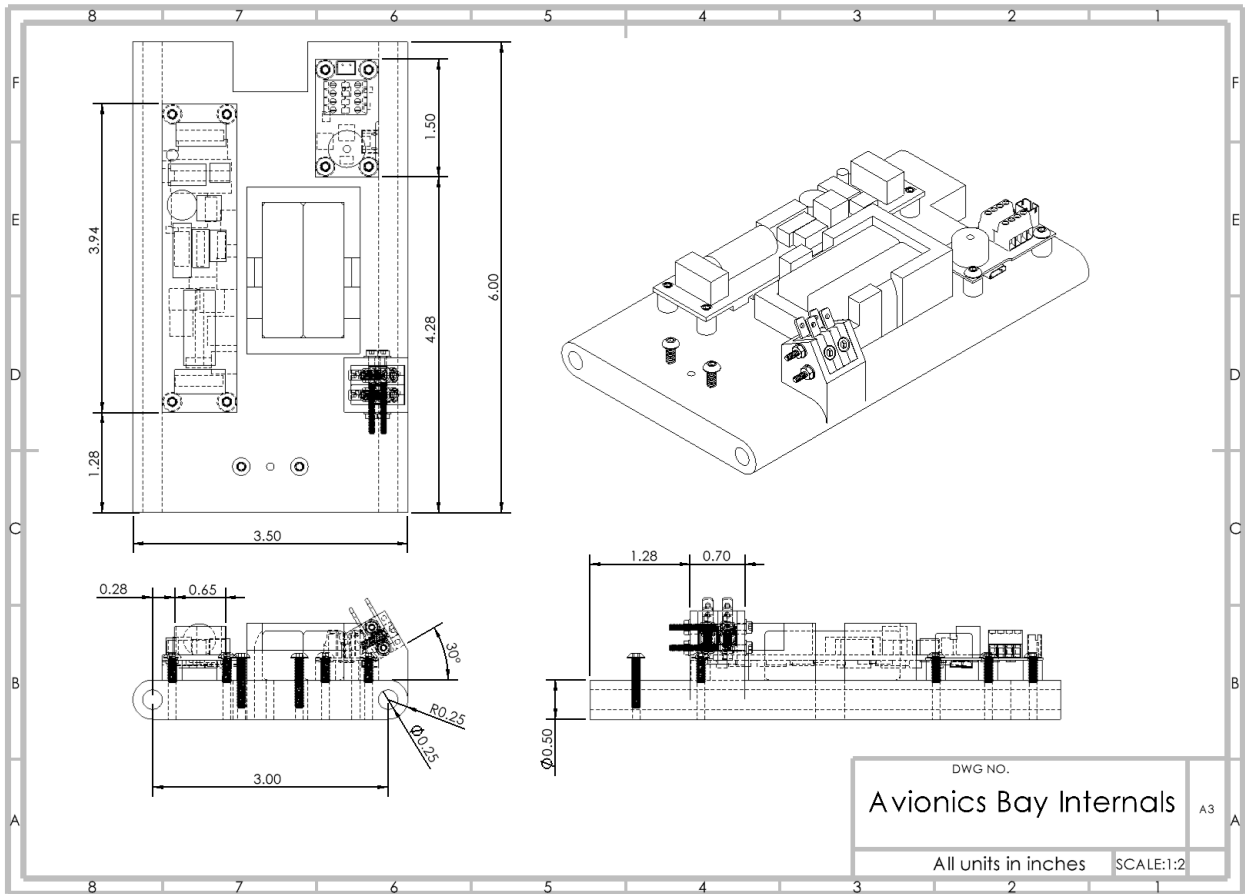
Avionics Bay Internals Dimensional Drawing
